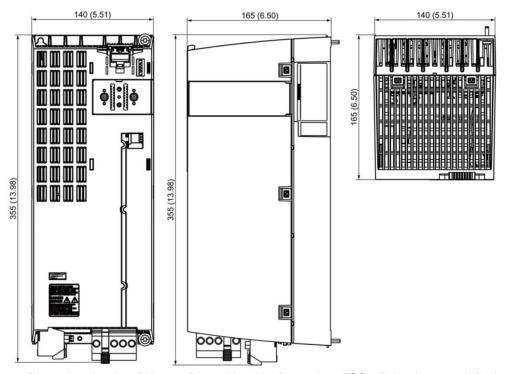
Dimension drawing, PM240-2 Power Modules, frame sizes FSC; all data in mm and (inches)
